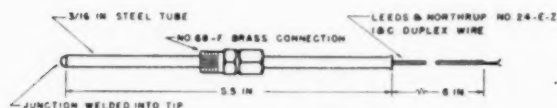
STEAM-SYSTEM THERMOCOUPLES
